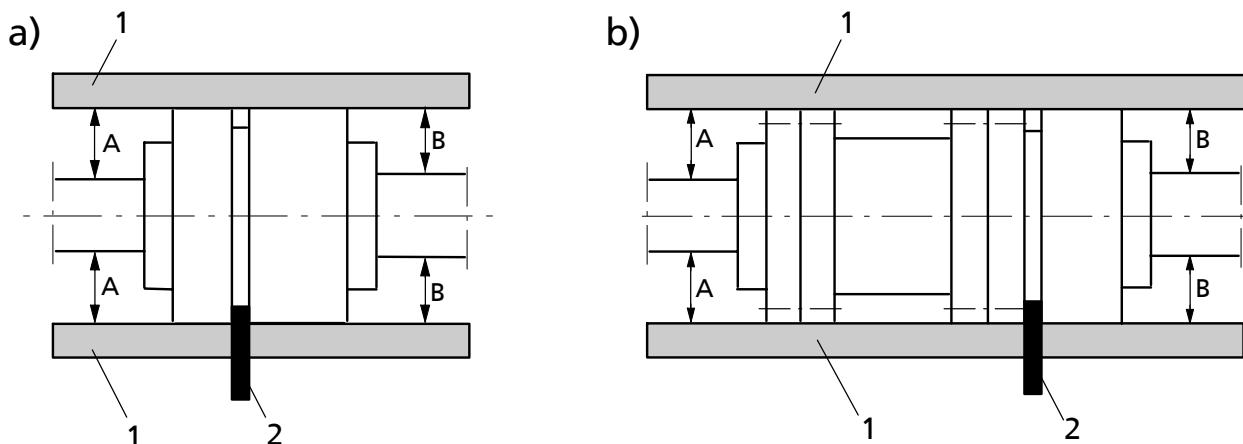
a) Checking the coupling alignment and b) Aligning a spacer-type coupling
